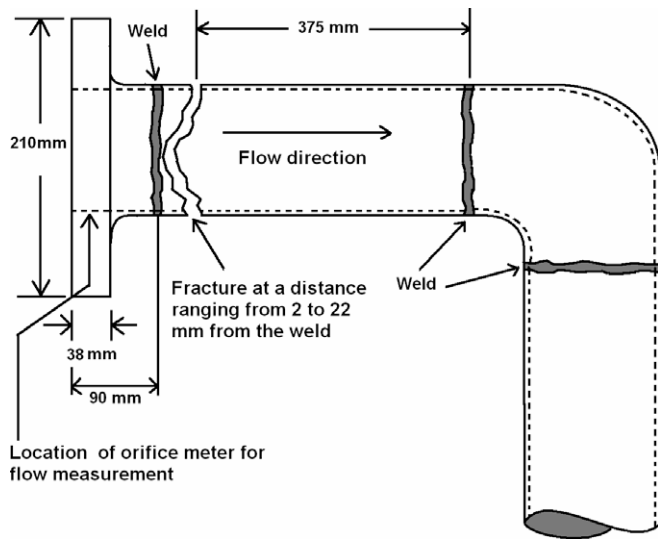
Schematic of the failed pipeline indicating the location of the fracture surface, welds and the orifice meter for flow measurement.
